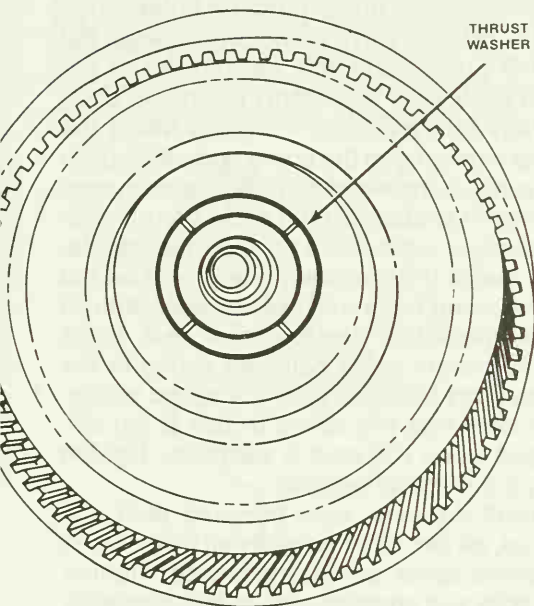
Location of mainshaft thrust washer. (American Motors Corporation)
